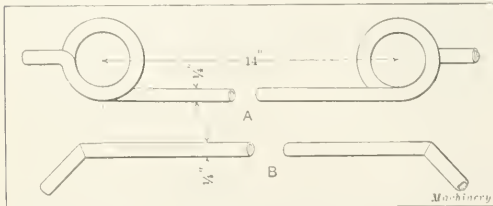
Blank B with Ends bent to Angle of 60 Degrees and Finished Piece A
